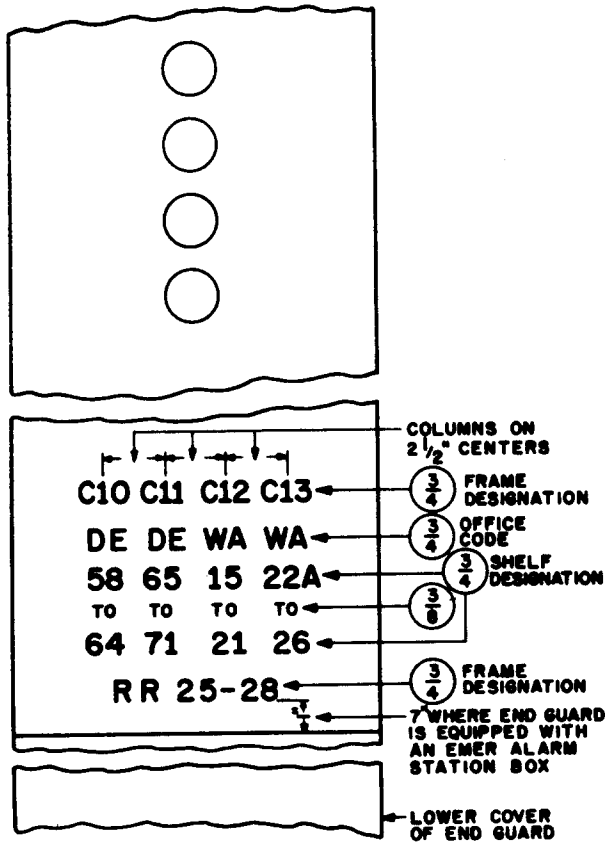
Typical Stamping Arrangement on Cabinet-type End Guards in Step-by-Step Offices
